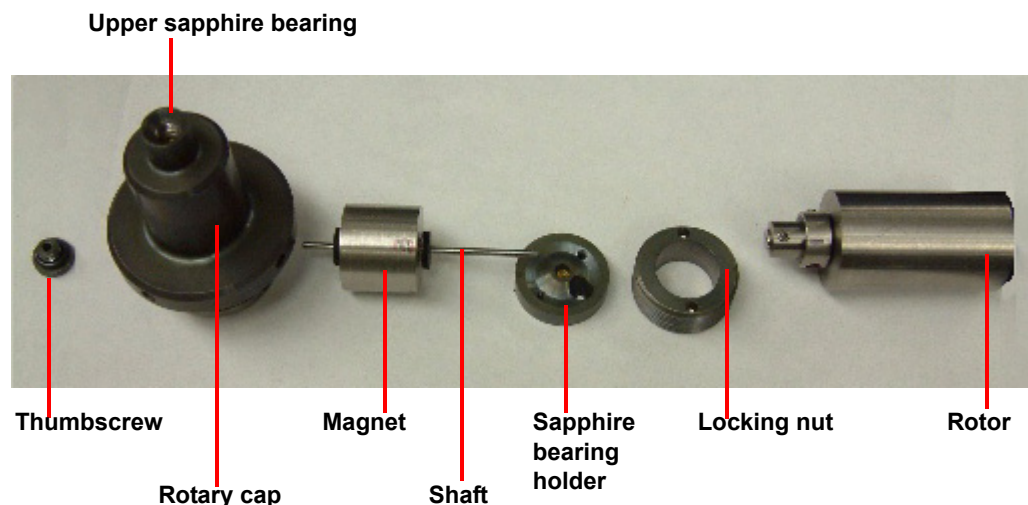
Parts of the rotary assembly (in correct order of assembly).
